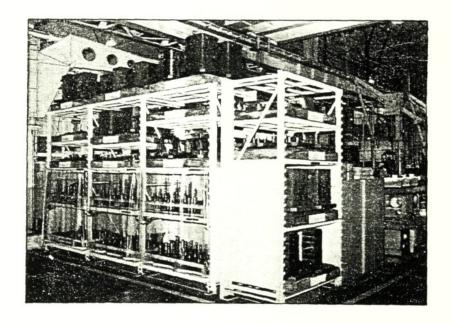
A small manually accessed tool and fixture stores for an FMS with seven machining centres
